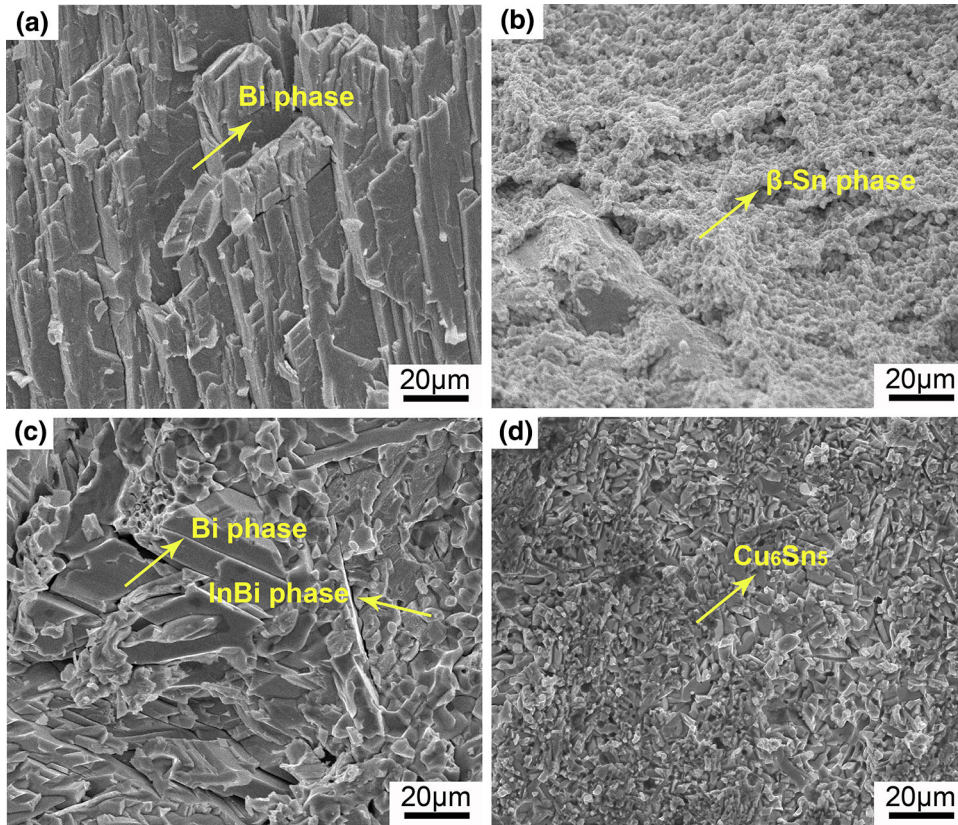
Fracture surfaces of solder alloys: (a) 38Sn-50Bi-12In, (b) 53Sn-35Bi-12In, and solder joints (c) 38Sn-50Bi-12In/Cu, (d) 53Sn-35Bi-12In/Cu.
